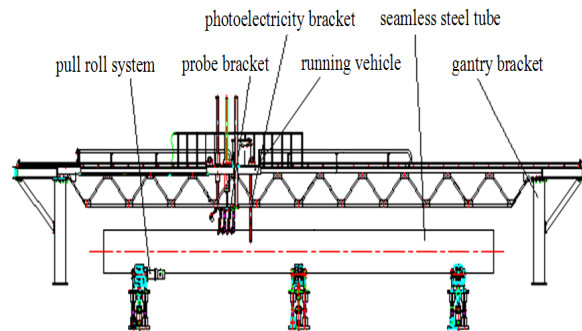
The machine system of seamless steel tube ultrasonic flaw detection system.
